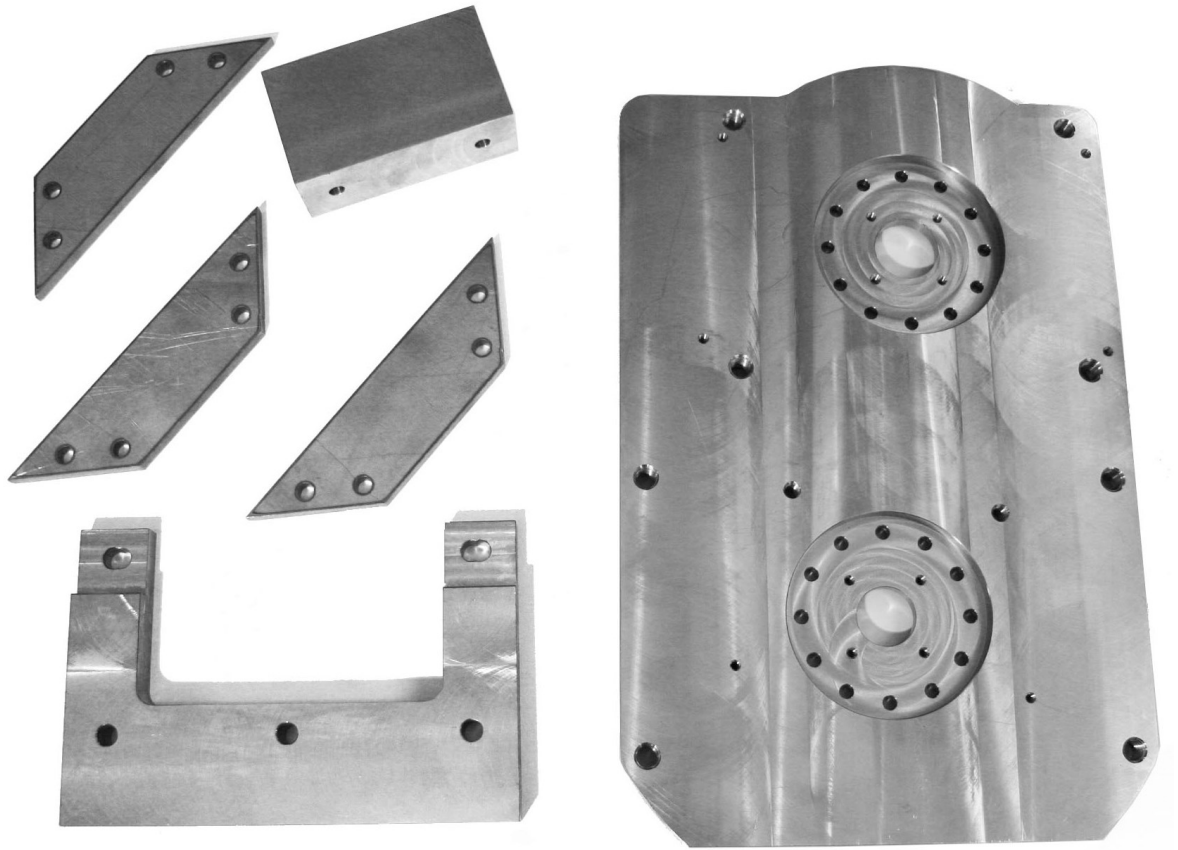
Rear axle drivetrain components on left side and the front axle belt drive interface plate on right side.
